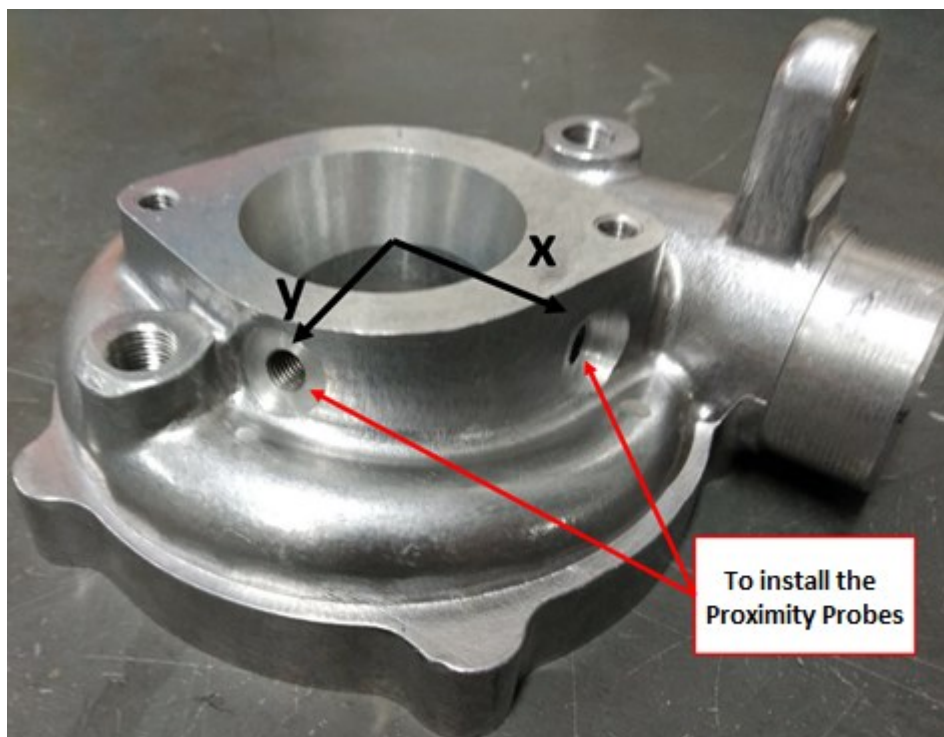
Turbocharger compressor housing modified to install the proximity probes
